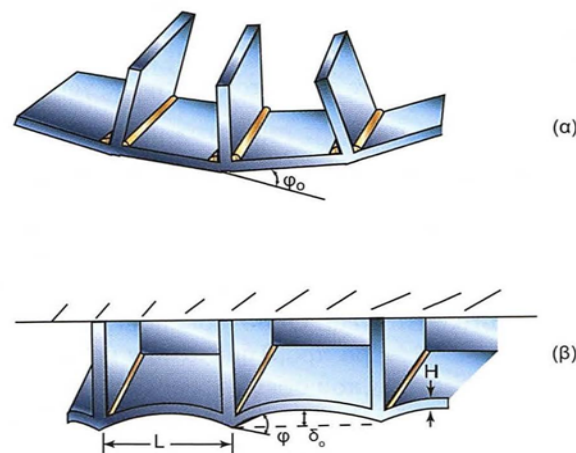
Angular change in cervical welds: (a) free welds, (b) welds with external restriction
